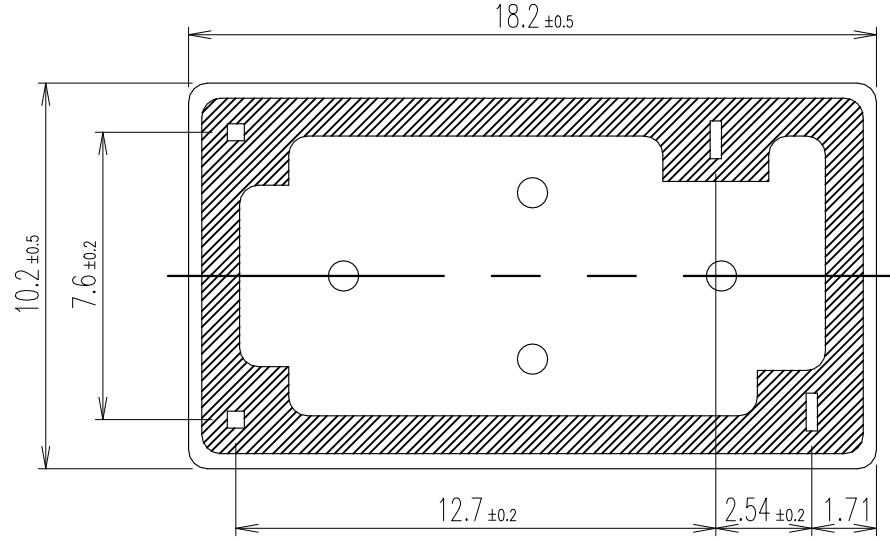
FIGURE FOR PRINTED CIRCUIT BOARD PROCESSING (BOTTOM VIEW)
